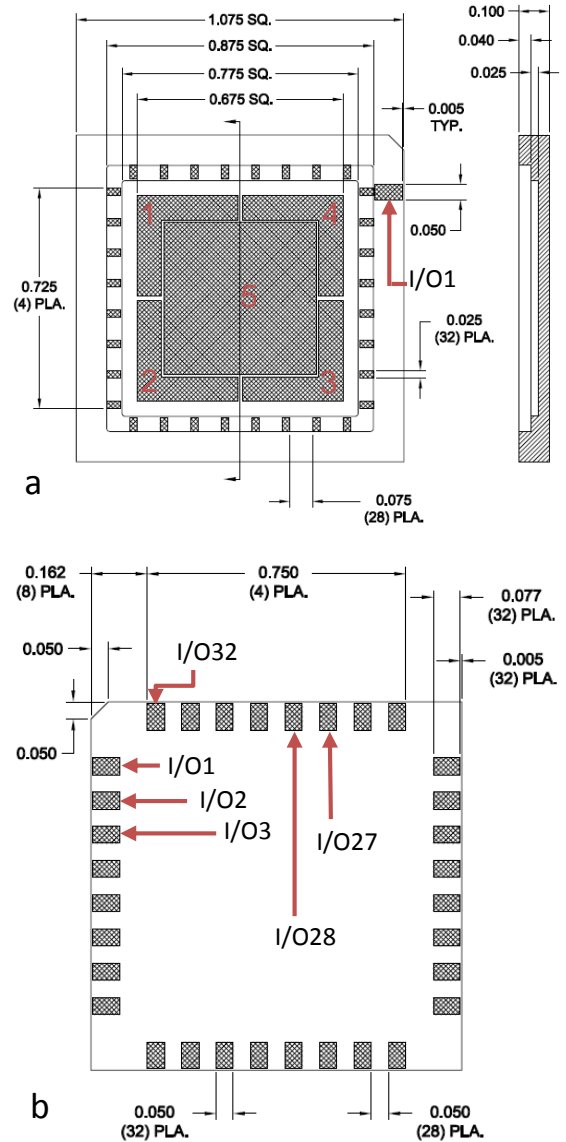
The drawings of 32-pin co-fired Pt/92% alumina package measured 27.3 mm x 27.3 mm x 2.54 mm. 1(a) is the top view of the package and 1(b) is the bottom view of the package. All the dimensions are in unit of inch (1 inch = 25.4mm). Fig. 1a shows five separate pads on the package floor.
